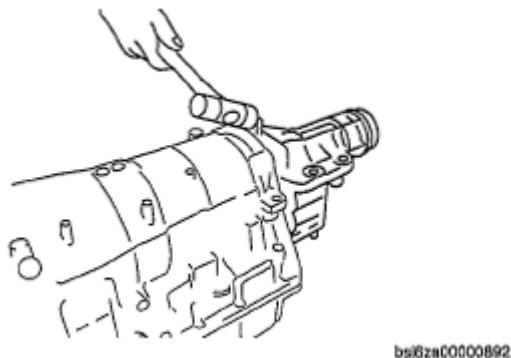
Tapping Extension Housing Using Plastic Hammer
